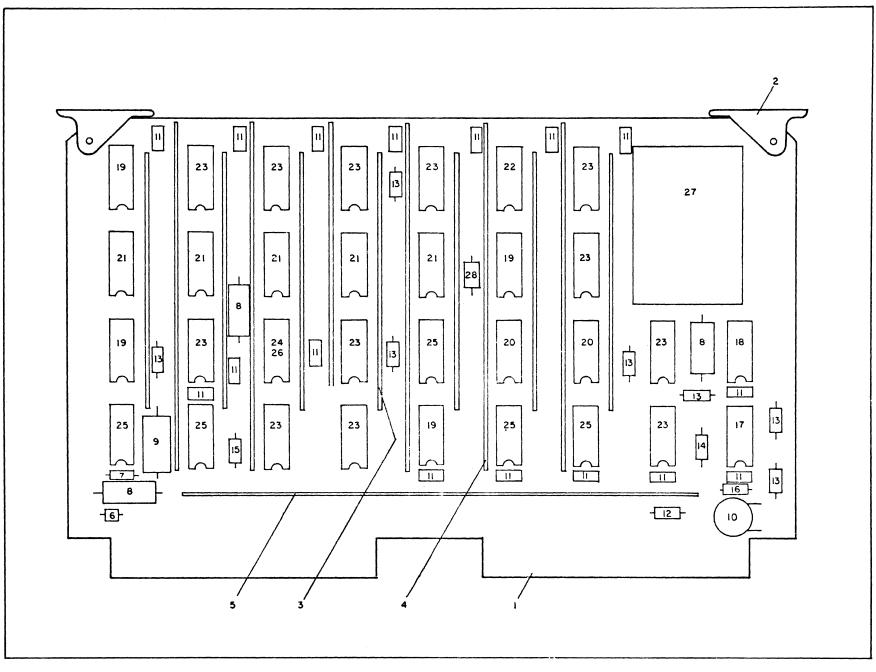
P.C. ASSEMBLY - Sync Card
